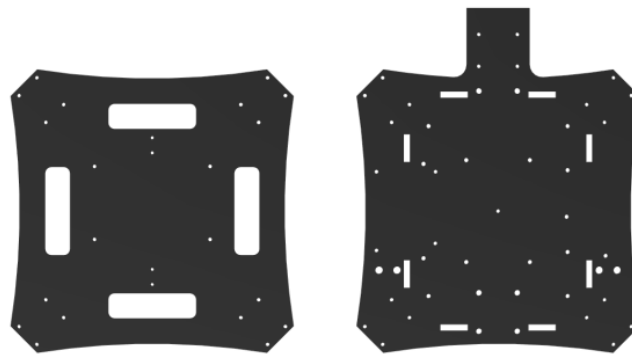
The top and bottom chassis plate profiles. The cutout pattern reduces plate mass and provides routes for internal wiring.
